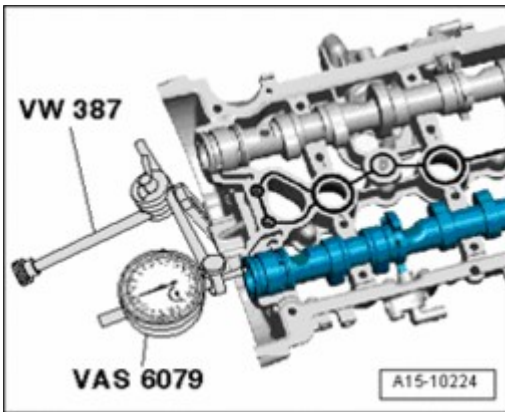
Securing Dial Gauge Holder VW 387 To Dial Gauge VAS 6079 On Cylinder Head
